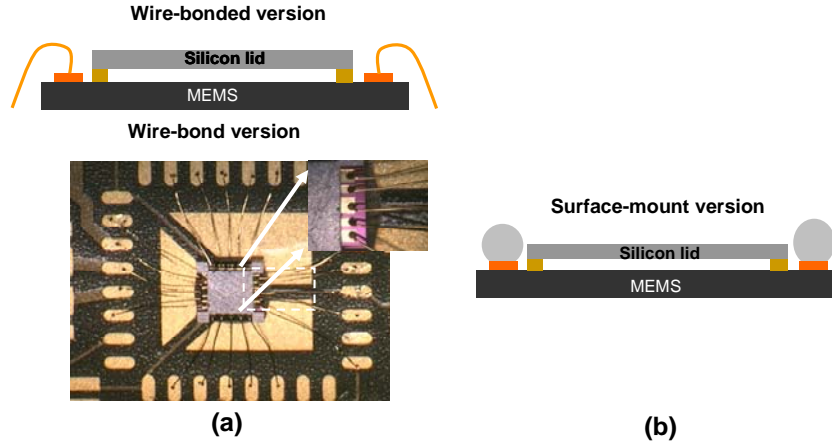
(a) Wire-bonded version. (b) Surface mount version.
